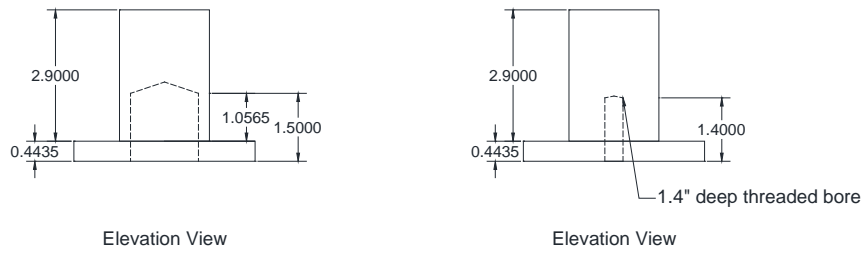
Details of the top and bottom pistons of the compaction split mold for fabricating the unsaturated triaxial and soil-water retention test specimens.
